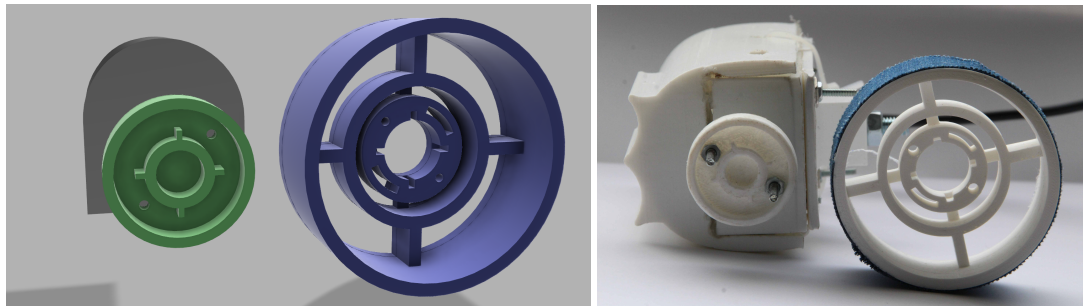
Left image, 3D-render: breakout of the attachment of the blue haptic wheel to the green base which is attached to the motor. Right image: breakout of the same attachment when 3D printed. Note in both the 3D-render and the 3D print the gaps and ridges which fit into each other.
